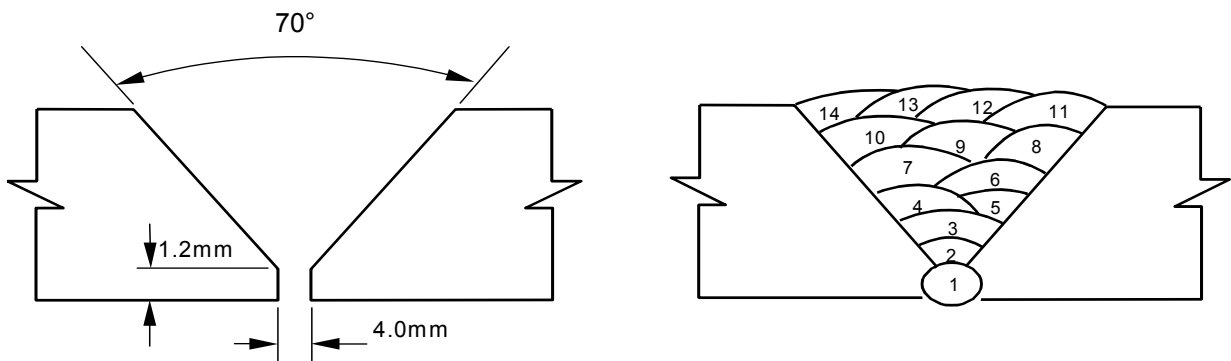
Joint preparation and weld run sequence of the procedure testing with the 6G pipe
